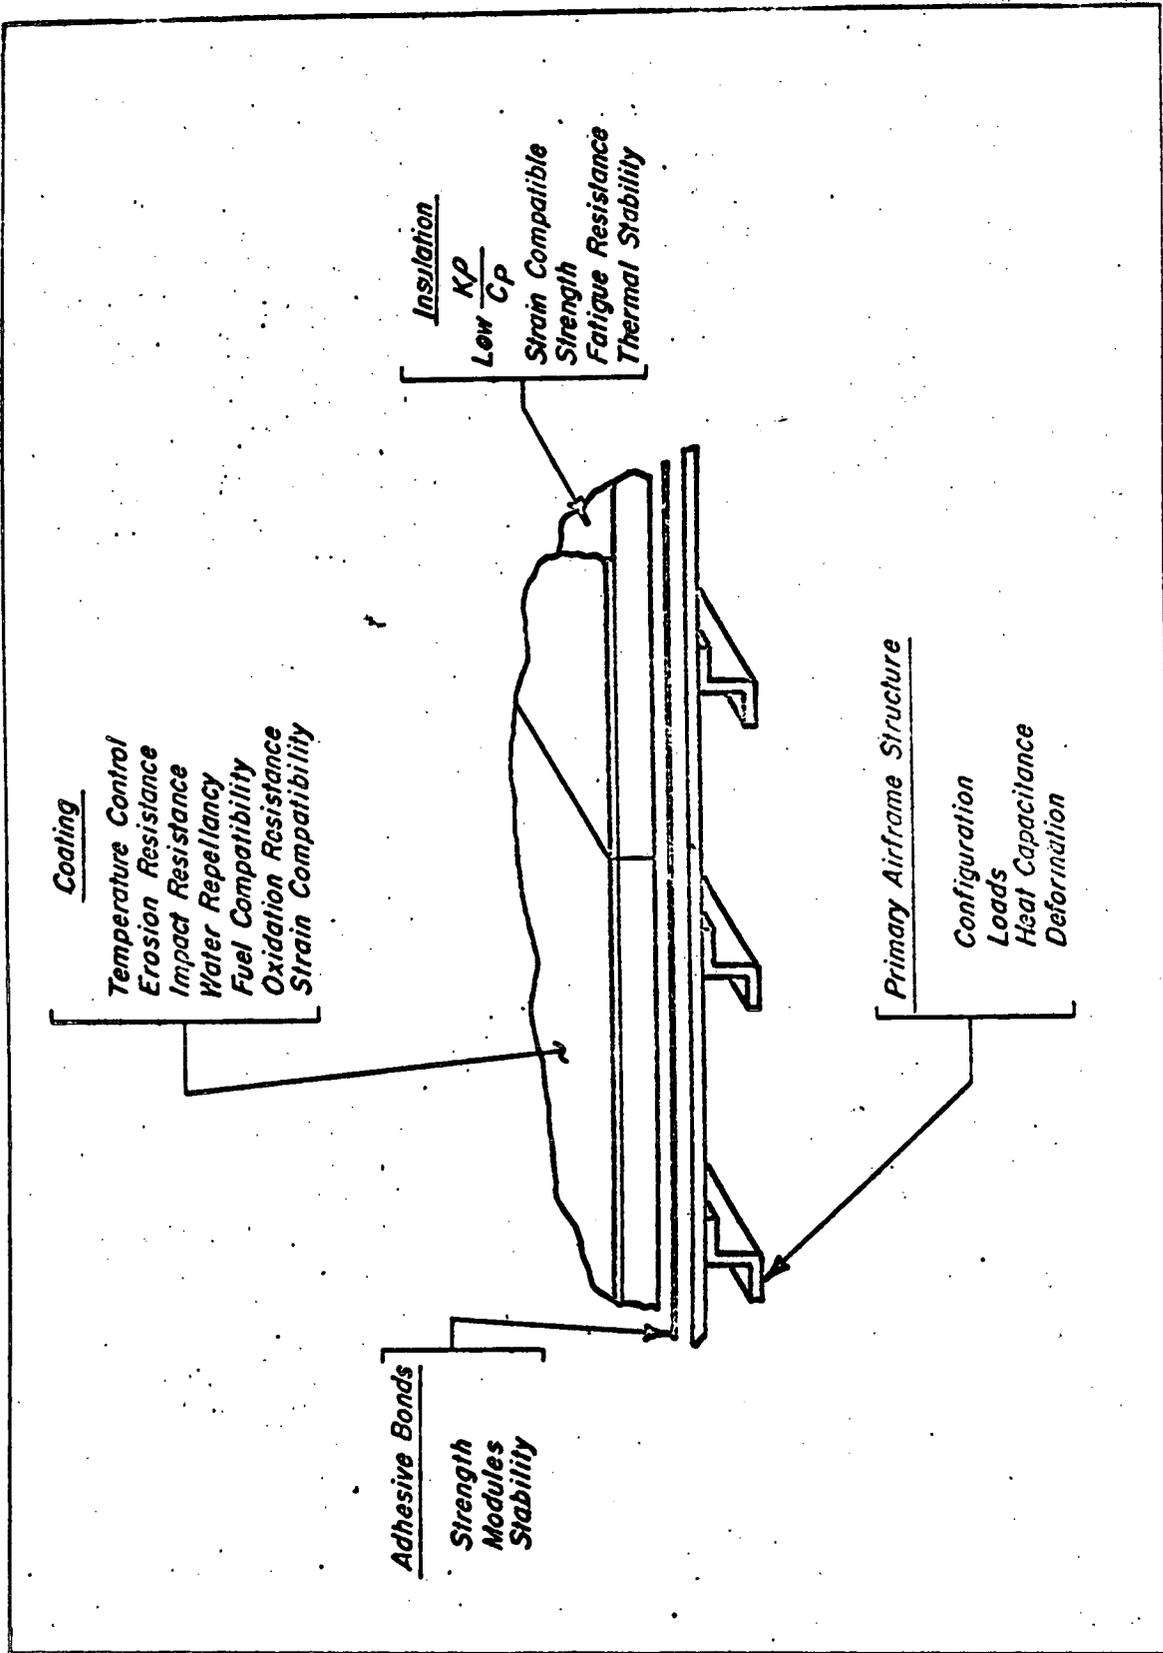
Typical Removable RSI Panel - Construction and Mounting Details and Structure.
